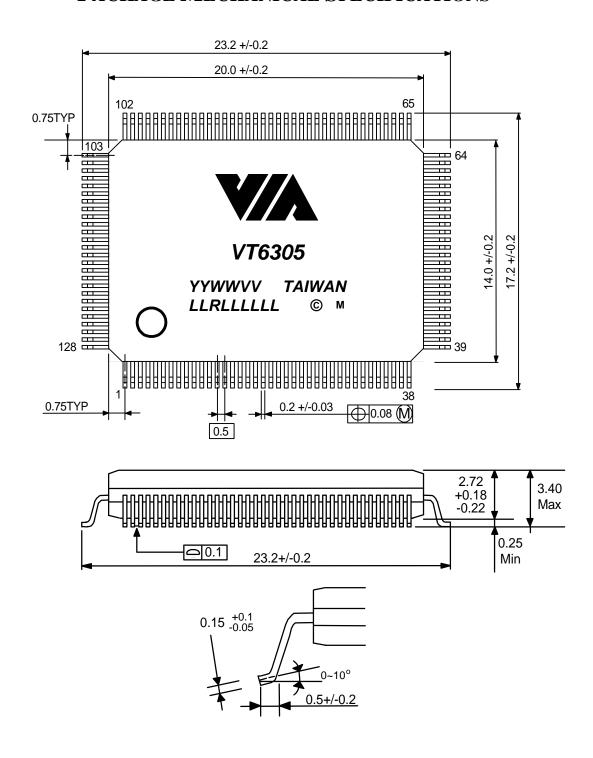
Mechanical Specifications – 128 Pin PQFP Package
